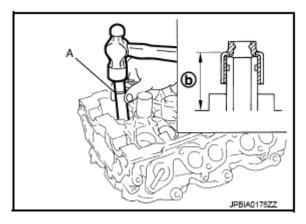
Pressing To Fit Valve Seal Using Drift Courtesy of NISSAN NORTH AMERICA, INC.
